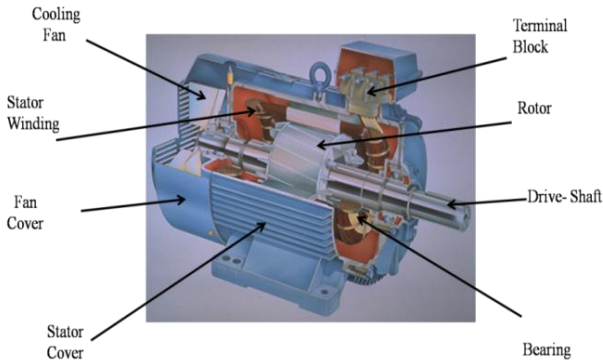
A cut-away view of a Squirrel Cage Induction Motor
